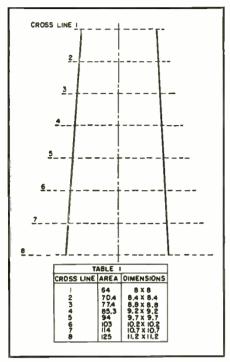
Details for laying out a low-frequency horn template. The dimensions of Table 1 should be used in construction.
